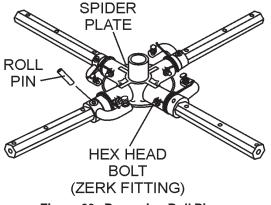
Removing Roll Pin and Zerk Grease Fitting
